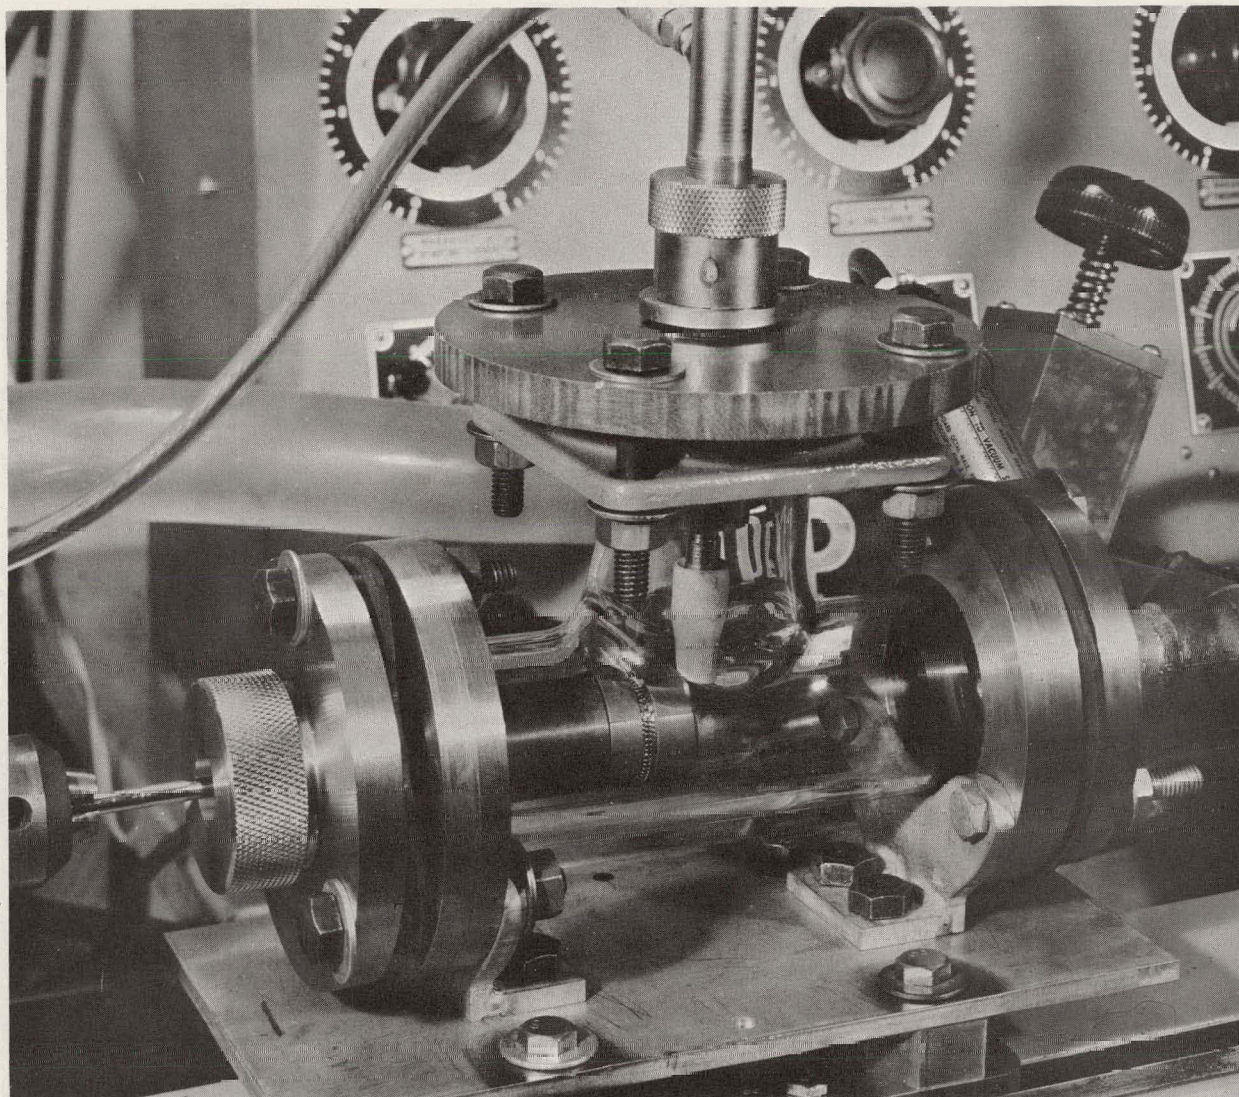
Inert Gas Welding Torch and Chamber
